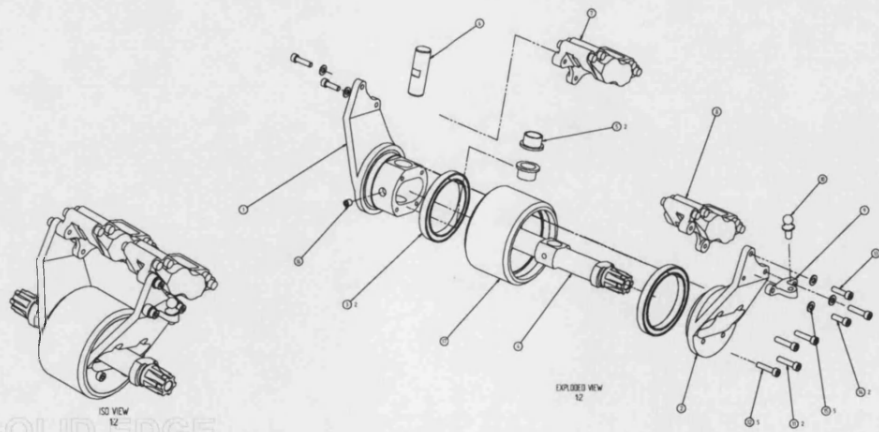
Front wheel hub and axle, isometric assembly and exploded view
